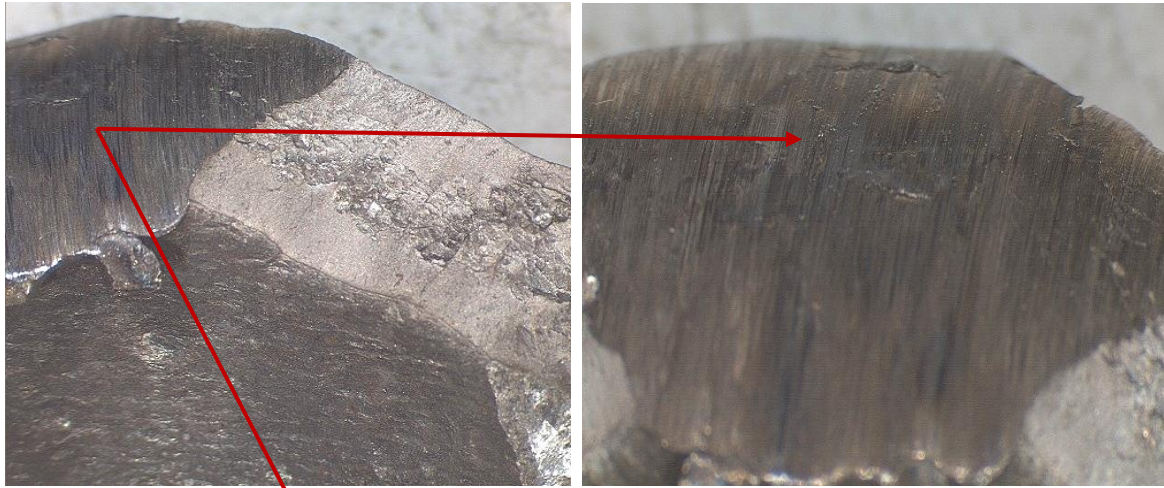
Stereo-photographs of one side of torn cap of 6 mm thick single plate after blast testing at 62g charge mass, 108 Ns, showing shearing failure
